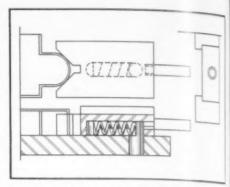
The V-slide locator above is used for locating on a round boss. Design permits centering work in relation to boss, while slide permits necessary motor
